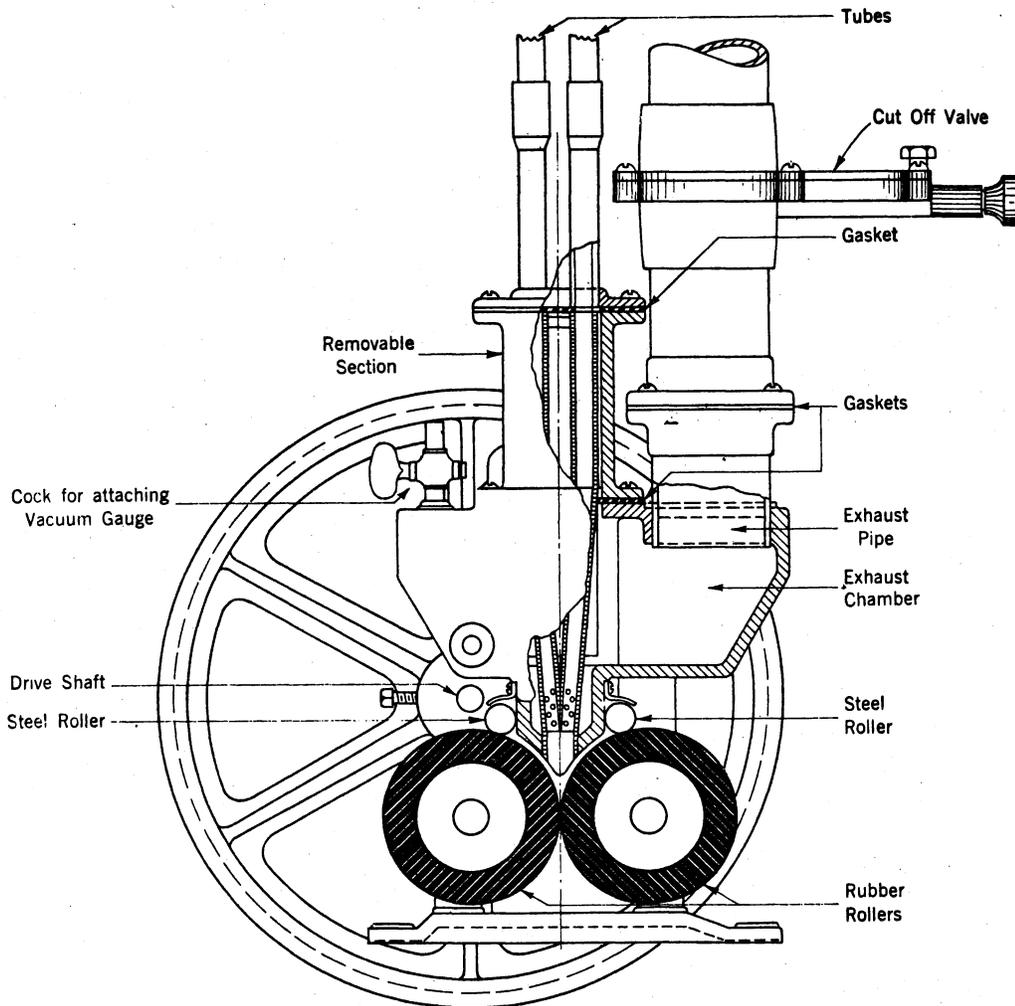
Roller Receiving Valve and Cutoff Valve.
